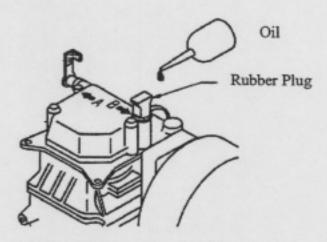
Adding Oil - Cylinder Head Cover Opening
